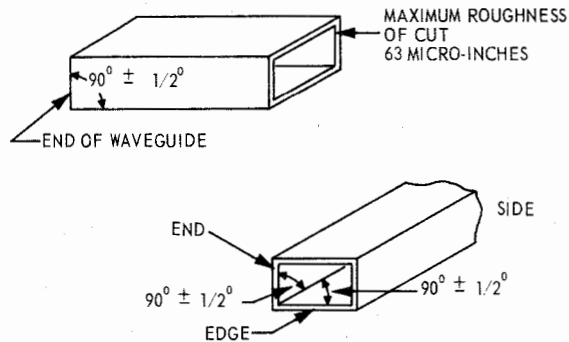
End View of Waveguide Showing Cutting Requirements
